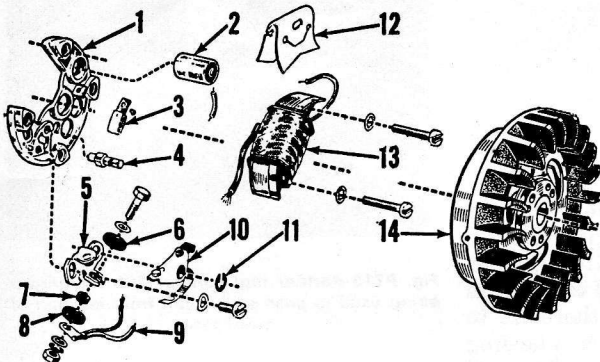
Exploded view of magneto used on Partner chain saws.
